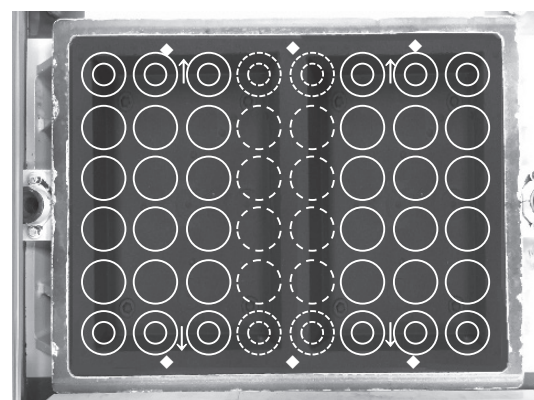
Position of segment foot, position of measurement and box shape mold.
